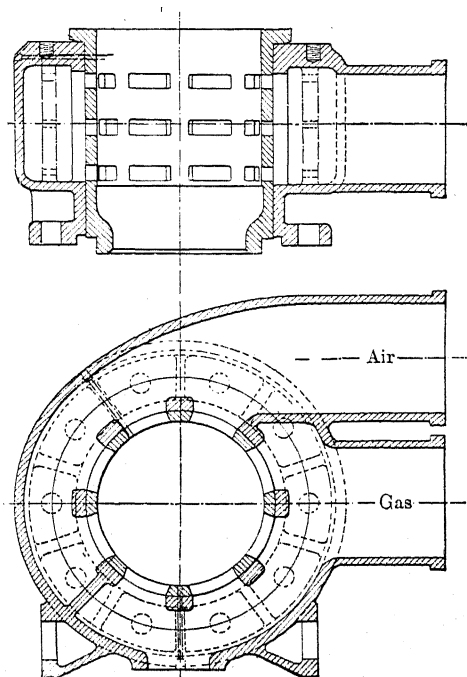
INLET SLIDE-VALVE OF THE ELSÄSSISCHE MASCHINENBAU-GESELLSCHAFT, MÜLHAUSEN.
